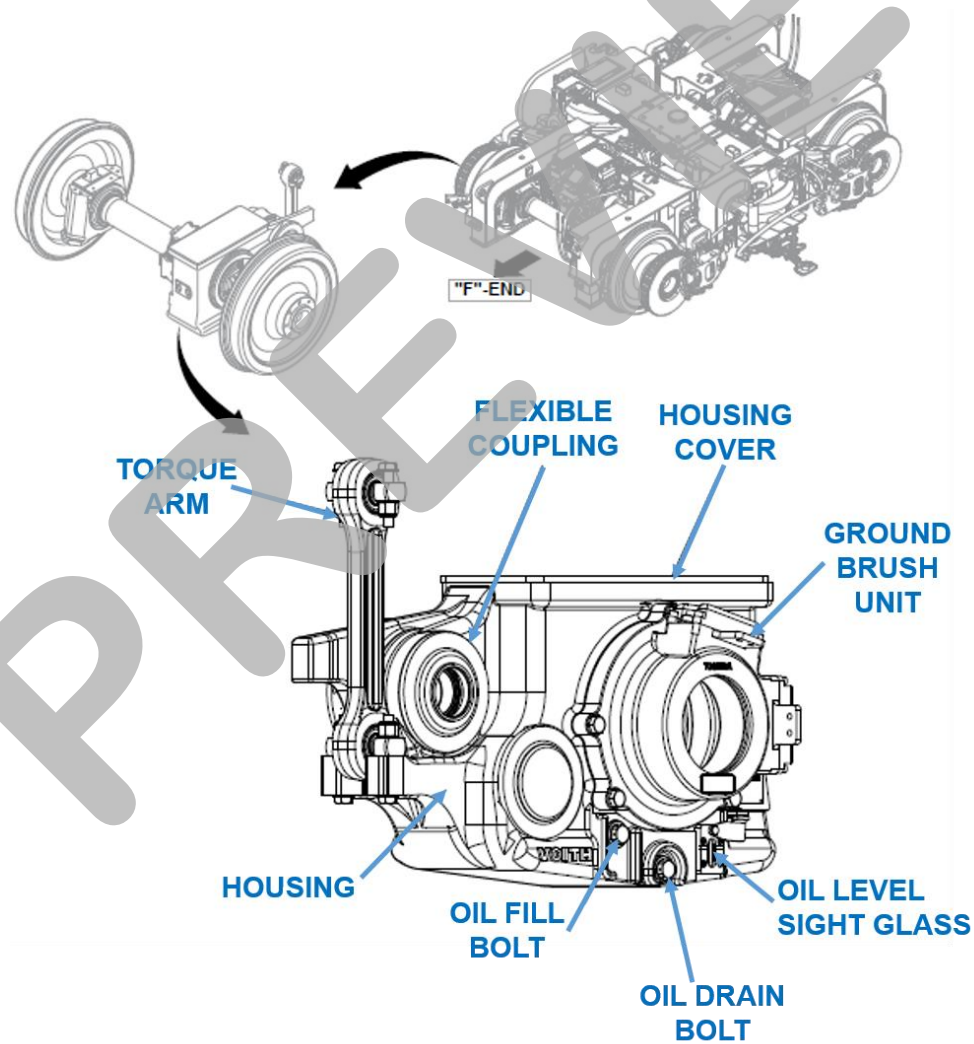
Gearbox Unit on HRV –Courtesy WMATA
